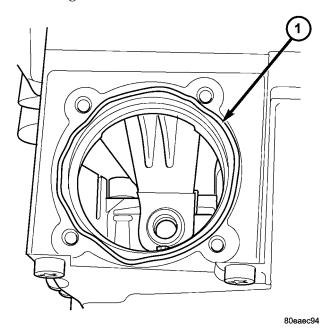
Apply Sealer to Shift Shaft Mounting Location
